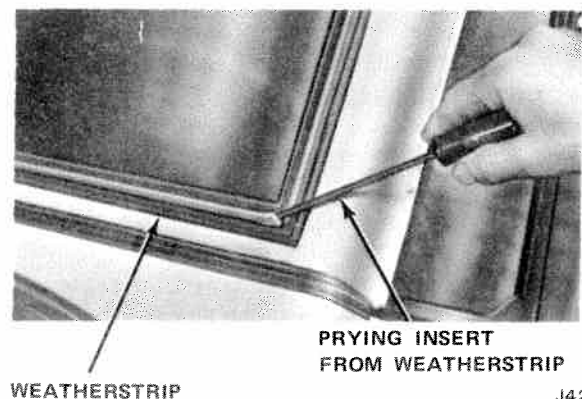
Removing Windshield Moulding Insert from Weatherstrip
